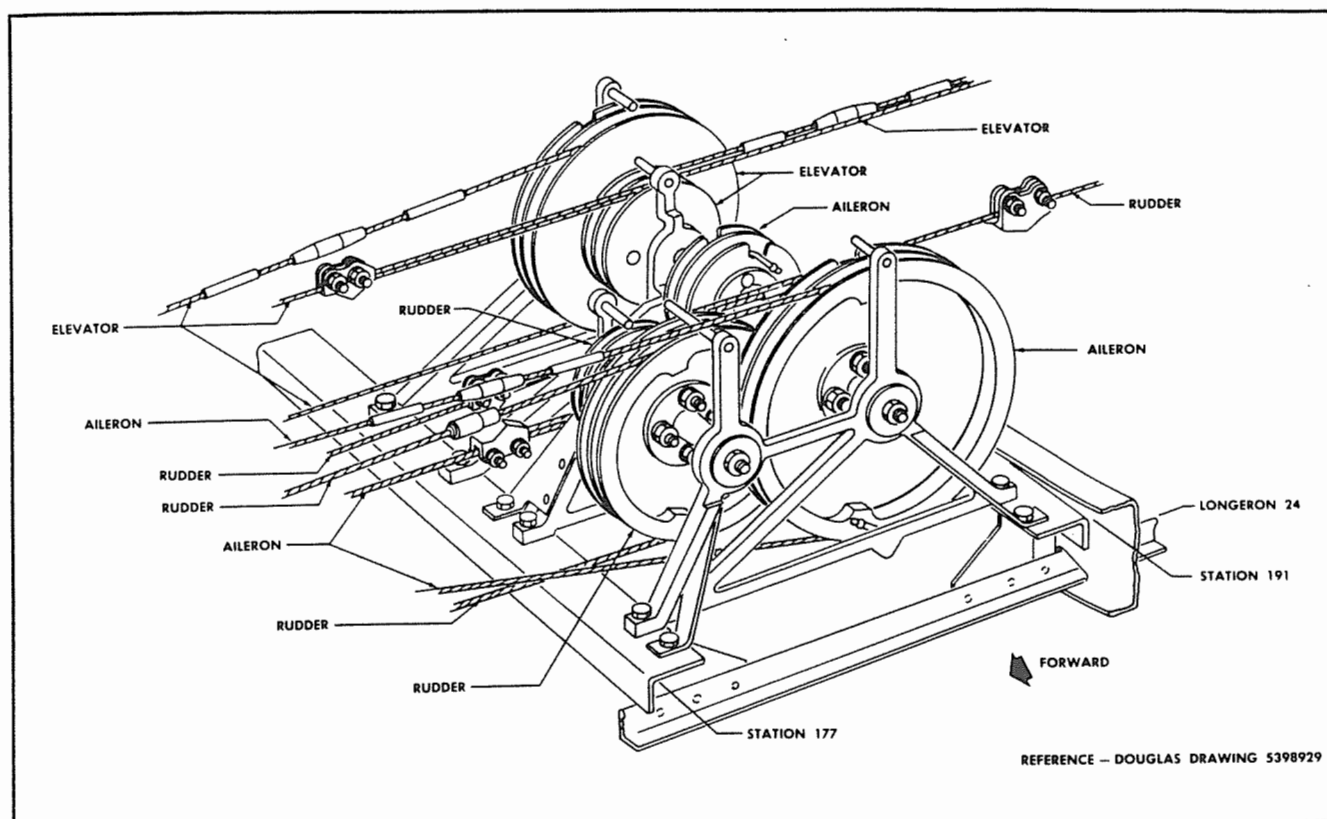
Differential Pulley Assemblies (Aircraft A, B, 1 through 43, 45 through 59, and 61 through 65)
